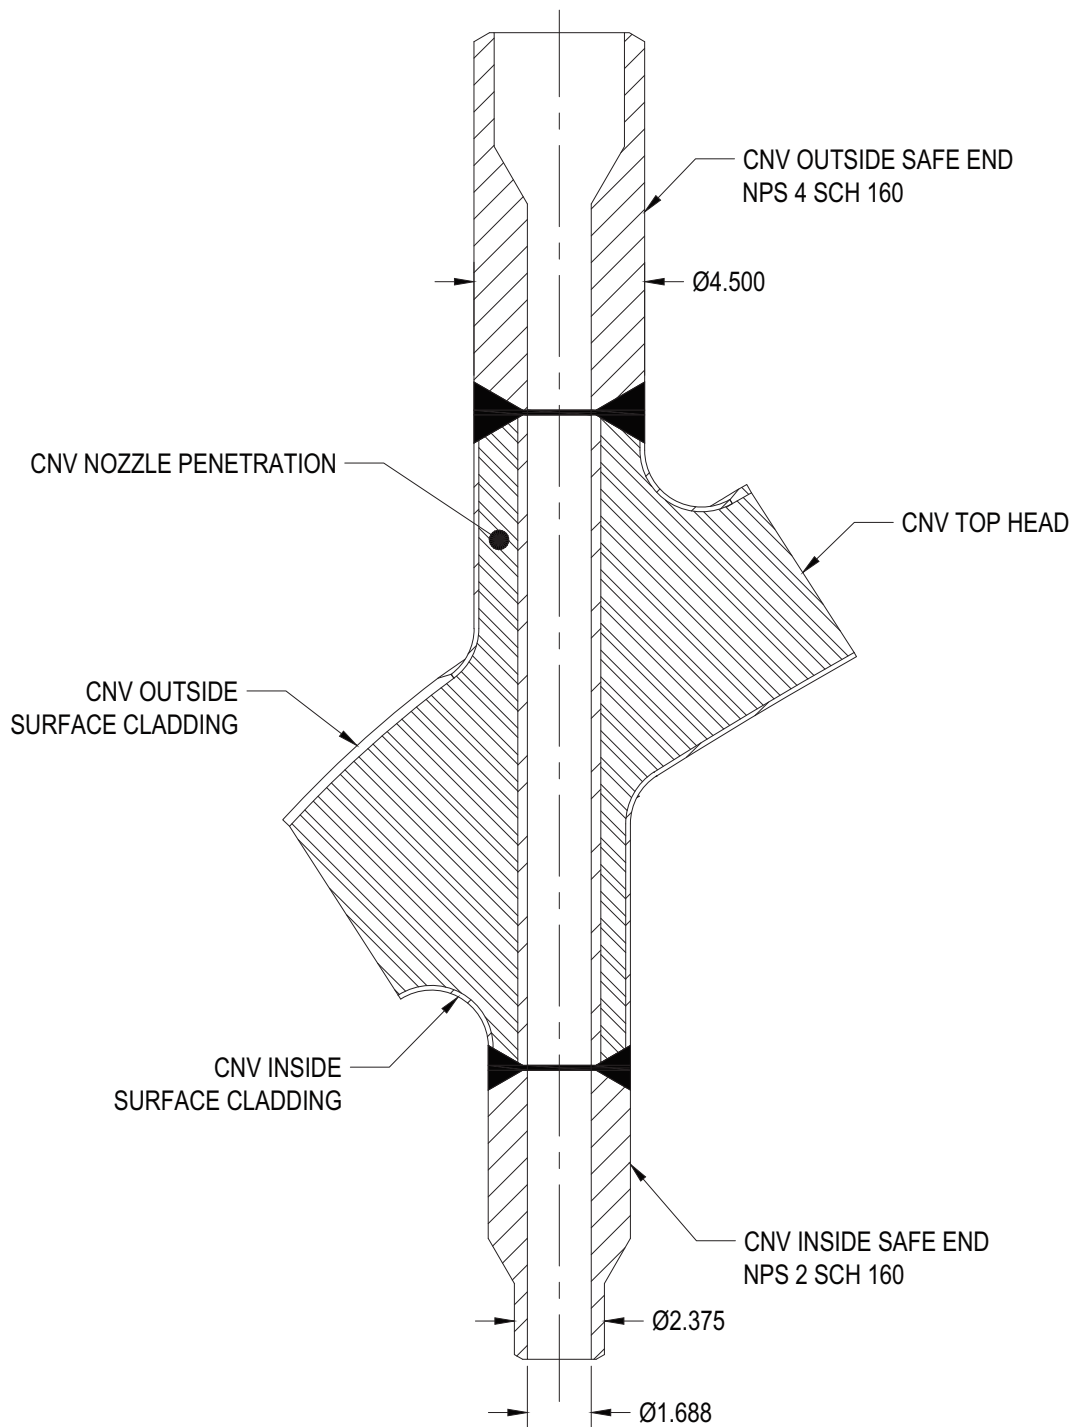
Containment Vessel Top Head Mechanical Penetrations
